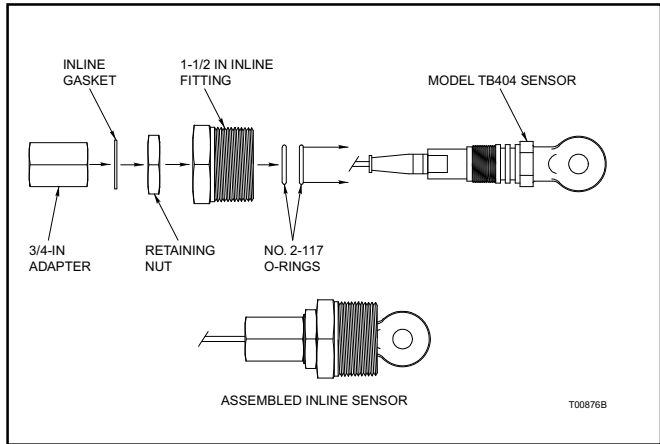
Model TB404 Sensor with Inline Flow Assembly
